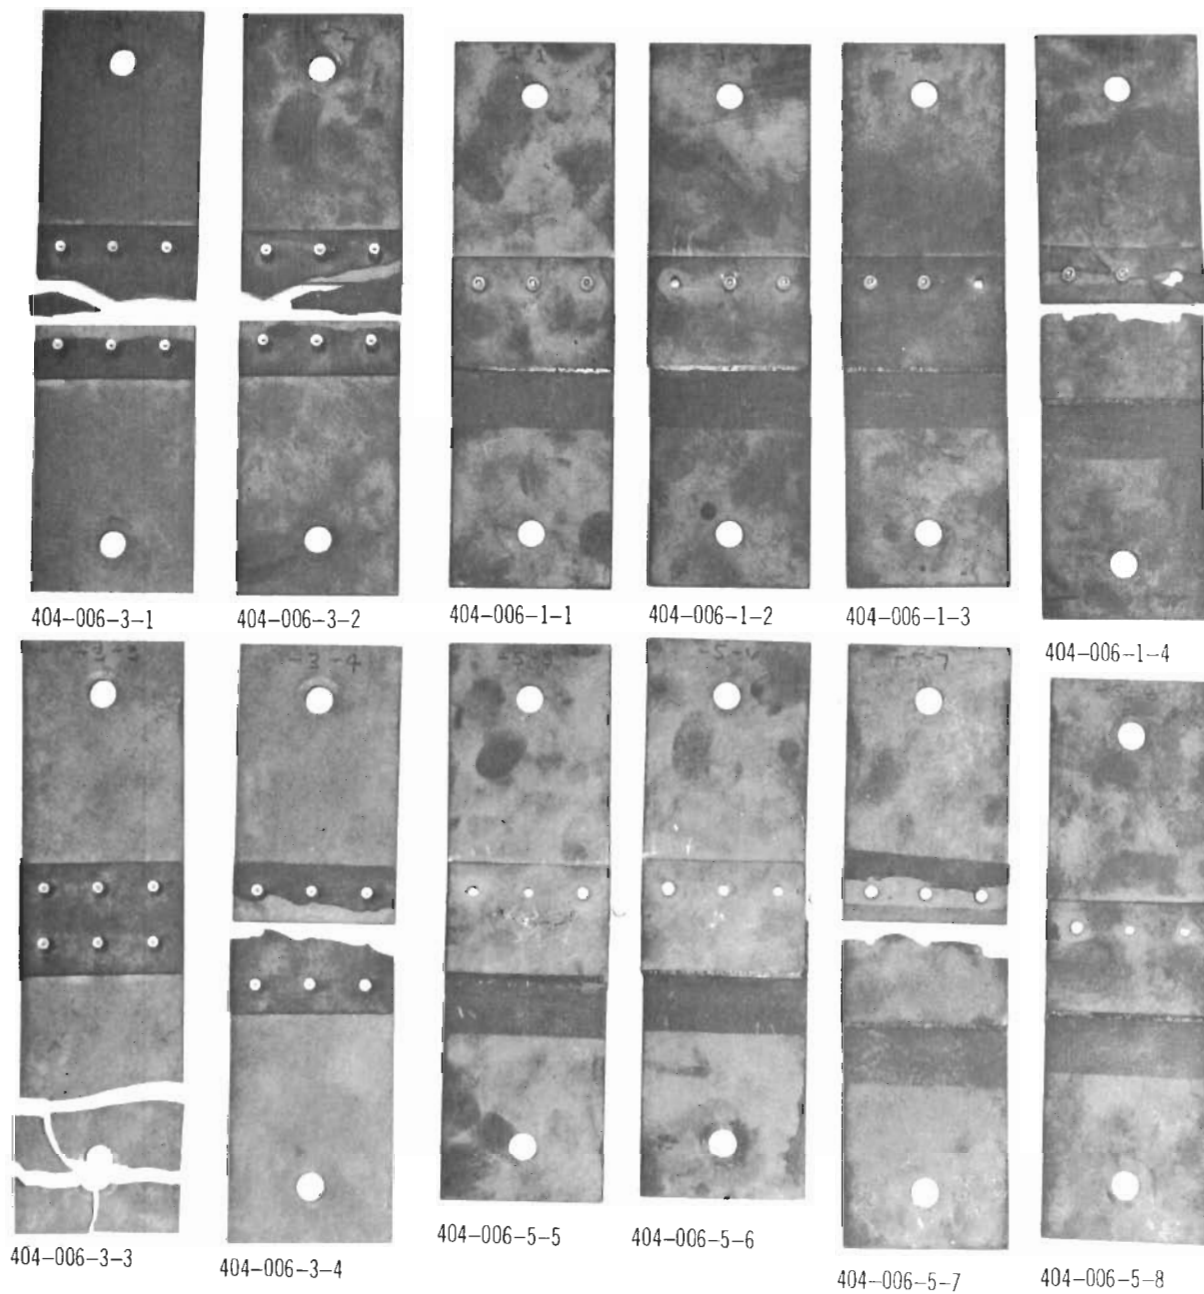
Spliced Beryllium Joint Test Failed Specimens
